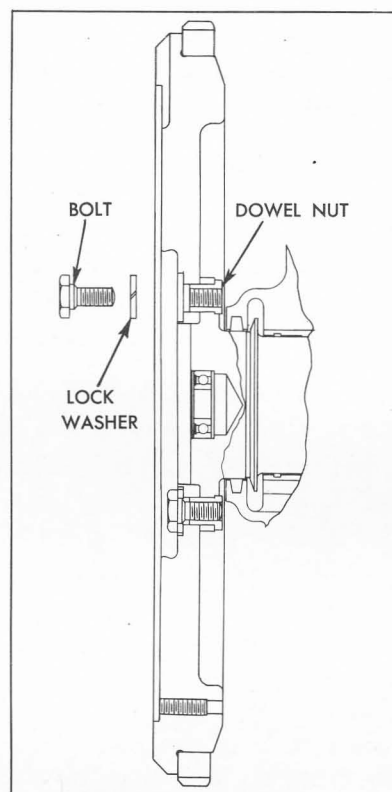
Flywheel Bolts and Dowel Nuts—1948 Series 70
